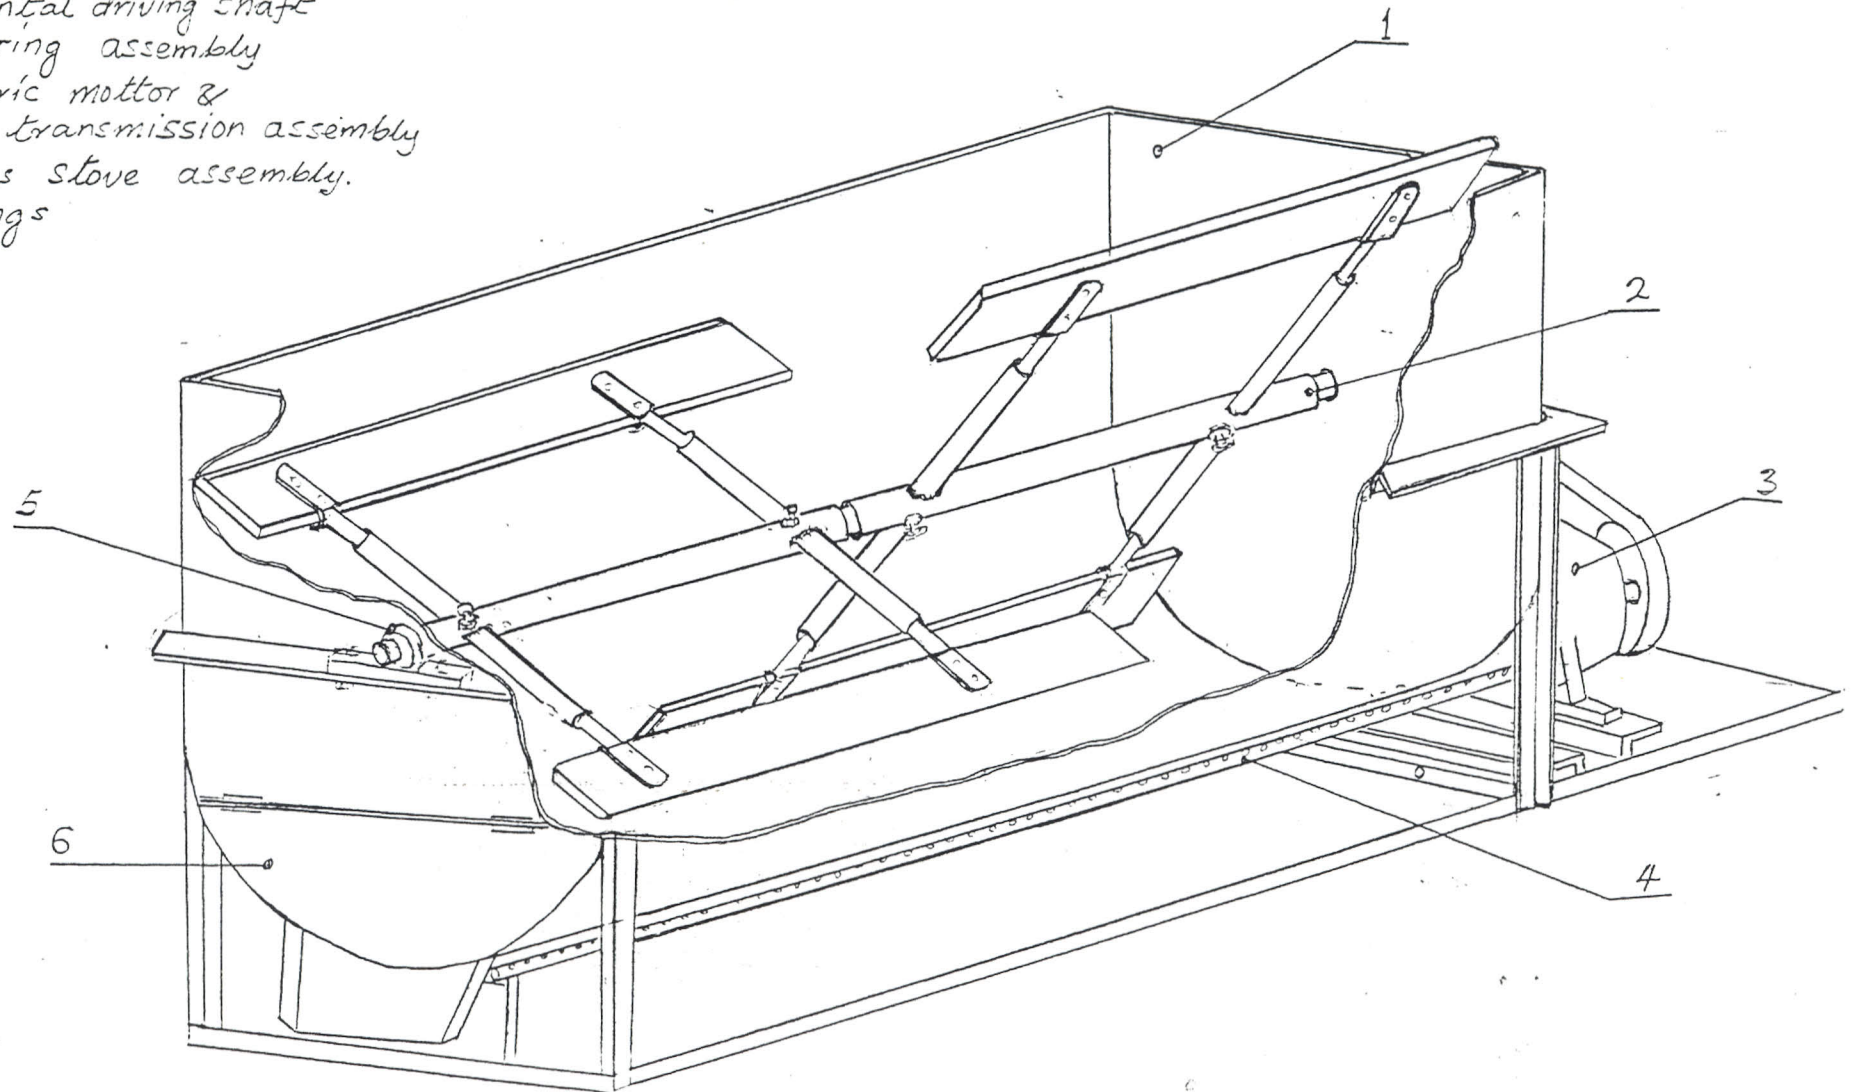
HORIZONTAL DRIVING SHAFT & STIRRING ASSEMBLY
